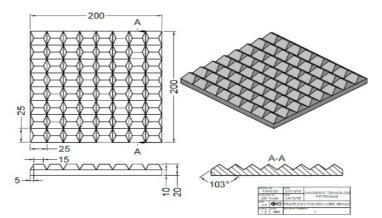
3D model design of trapezoidal folded lobe shape mould (all dimensions are in mm).
